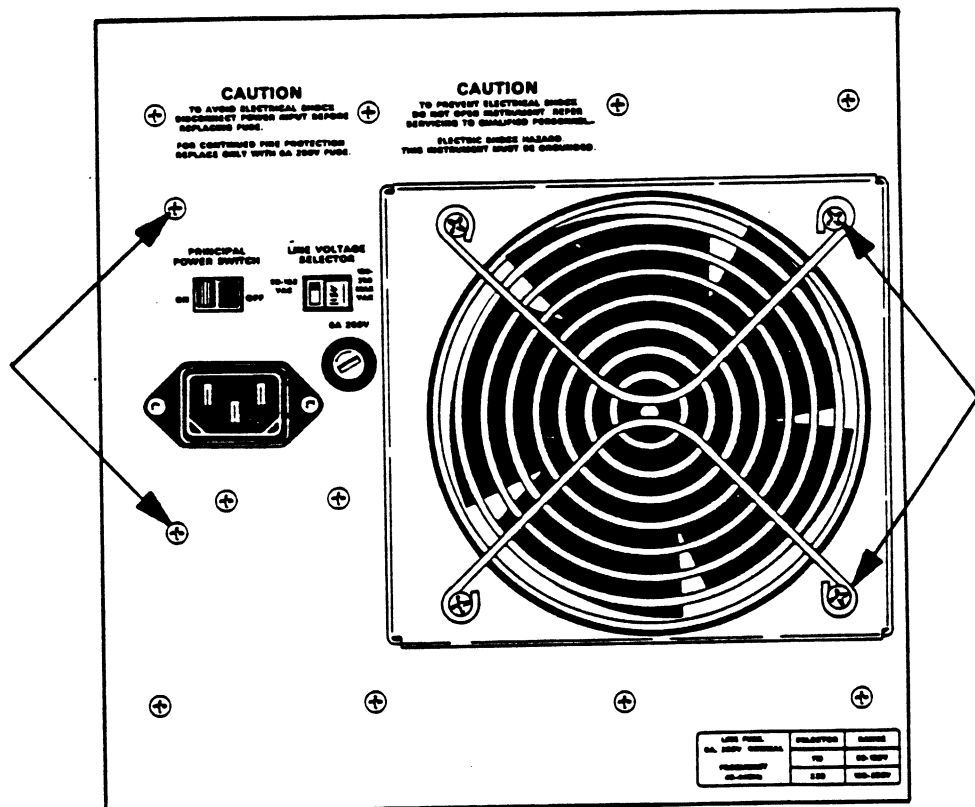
Location of rear panel screws securing the power supply cover.
